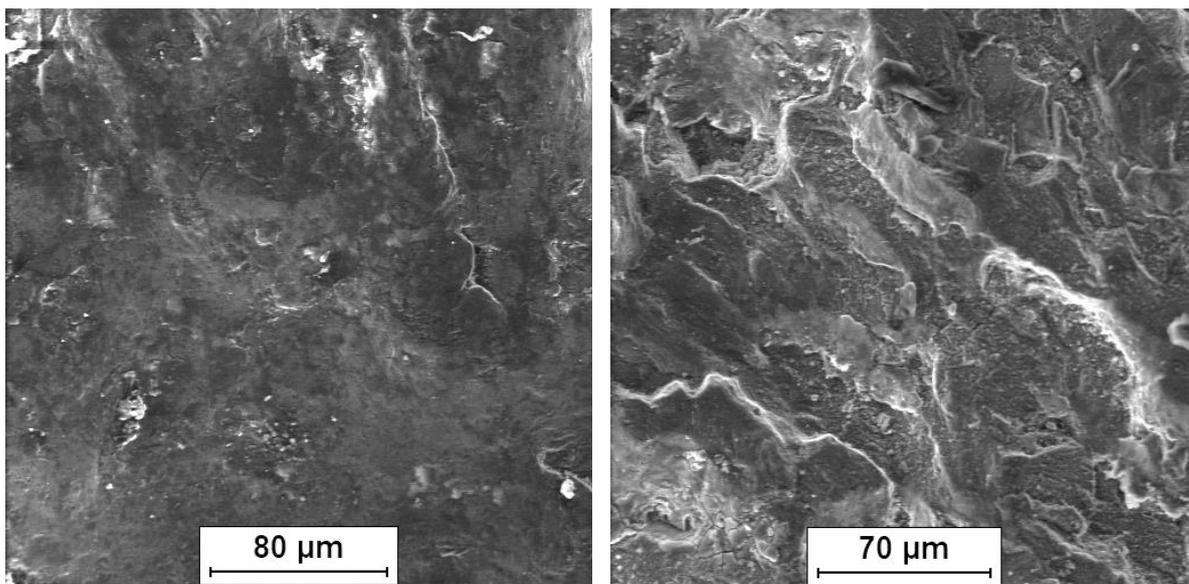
Fatigue crack from the upper area marked in fig. 20. Visible light fatigue striations [source: Silesian University of Technology]
